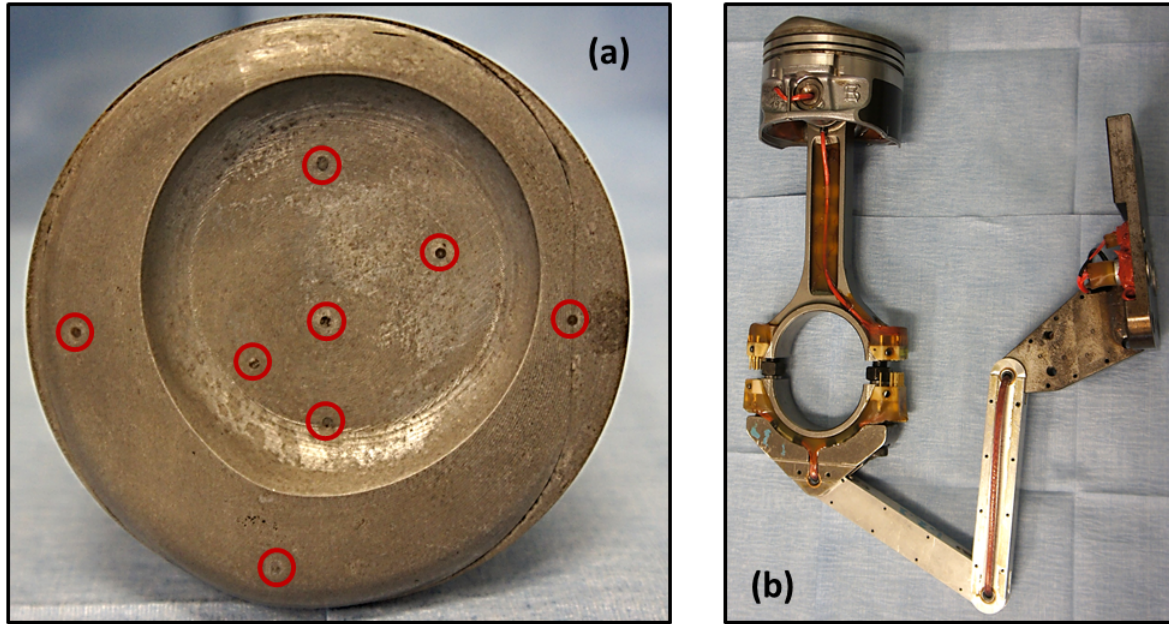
A close-up view of the instrumented piston (a), with measurement surfaces circled in red. An external mock-up of the piston-conrod assembly (b), prior to final fabrication and installation.
